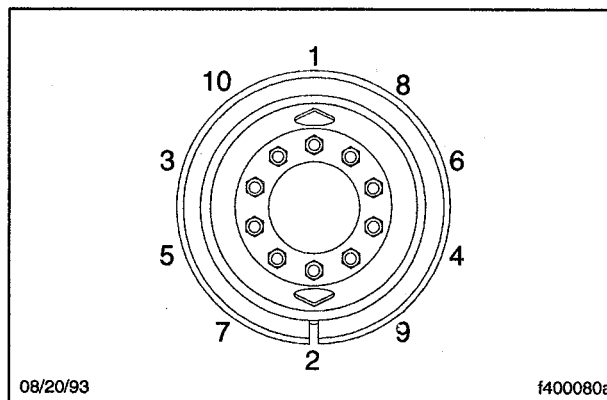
, 10-Stud Disc Wheel Tightening Sequence
